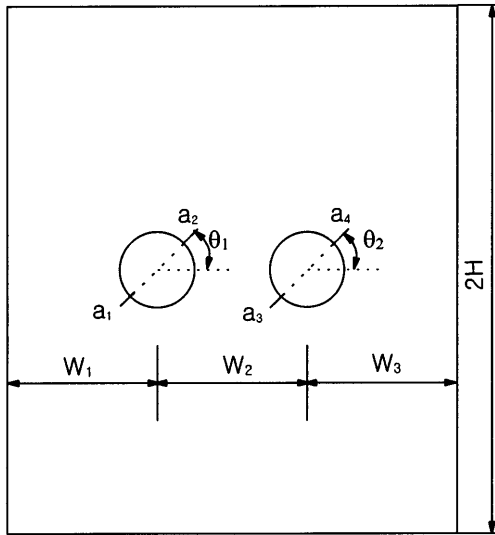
Assumed initial configurations of cracks emanating from loaded fastener holes
